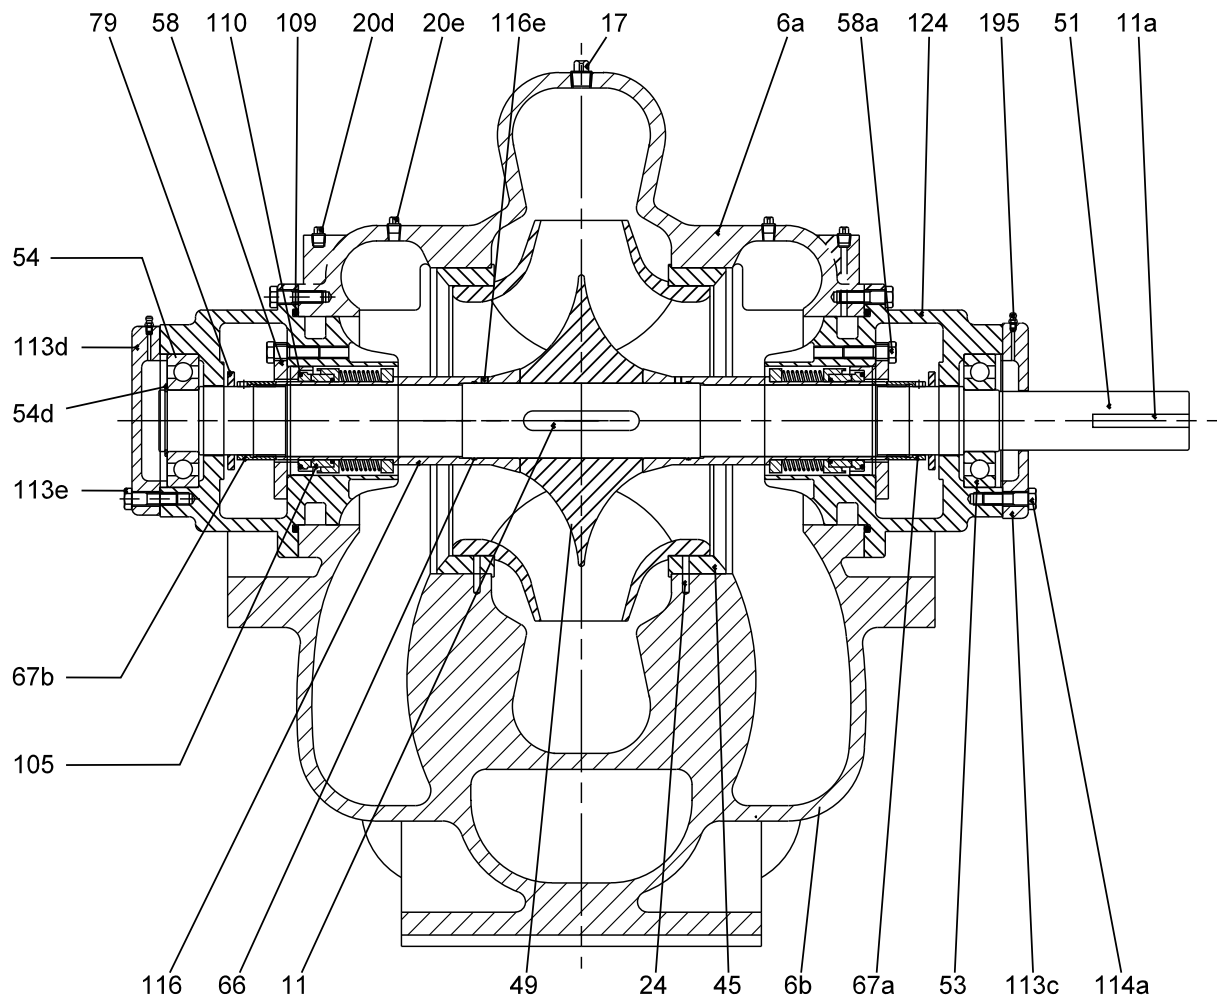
Sectional view, construction X4, with mechanical shaft seals
